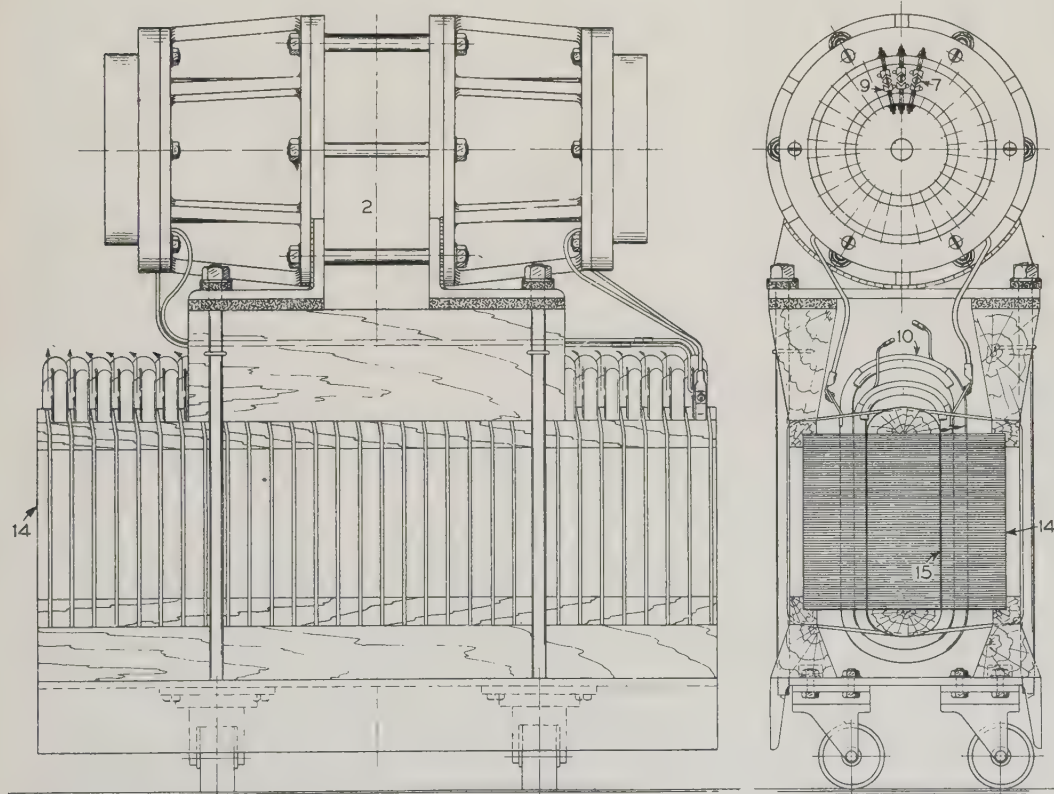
Assembled converter with transmuter mounted directly over transformer
